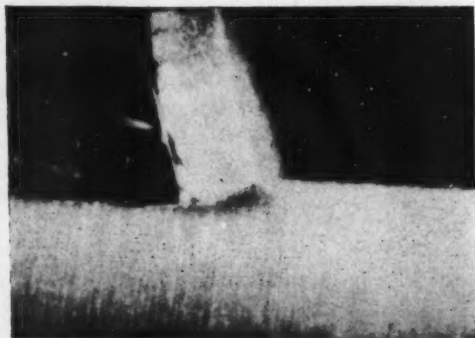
Photograph taken at 6,500 frames per sec. showing cold rolled steel being cut at 75 ft. per min. Cracks have formed in the chip
